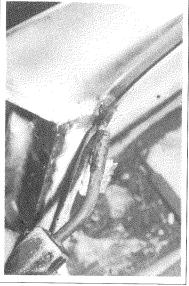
and at the top of the rear upright. A little braze might be alternatively applied here if you've a welded join.
